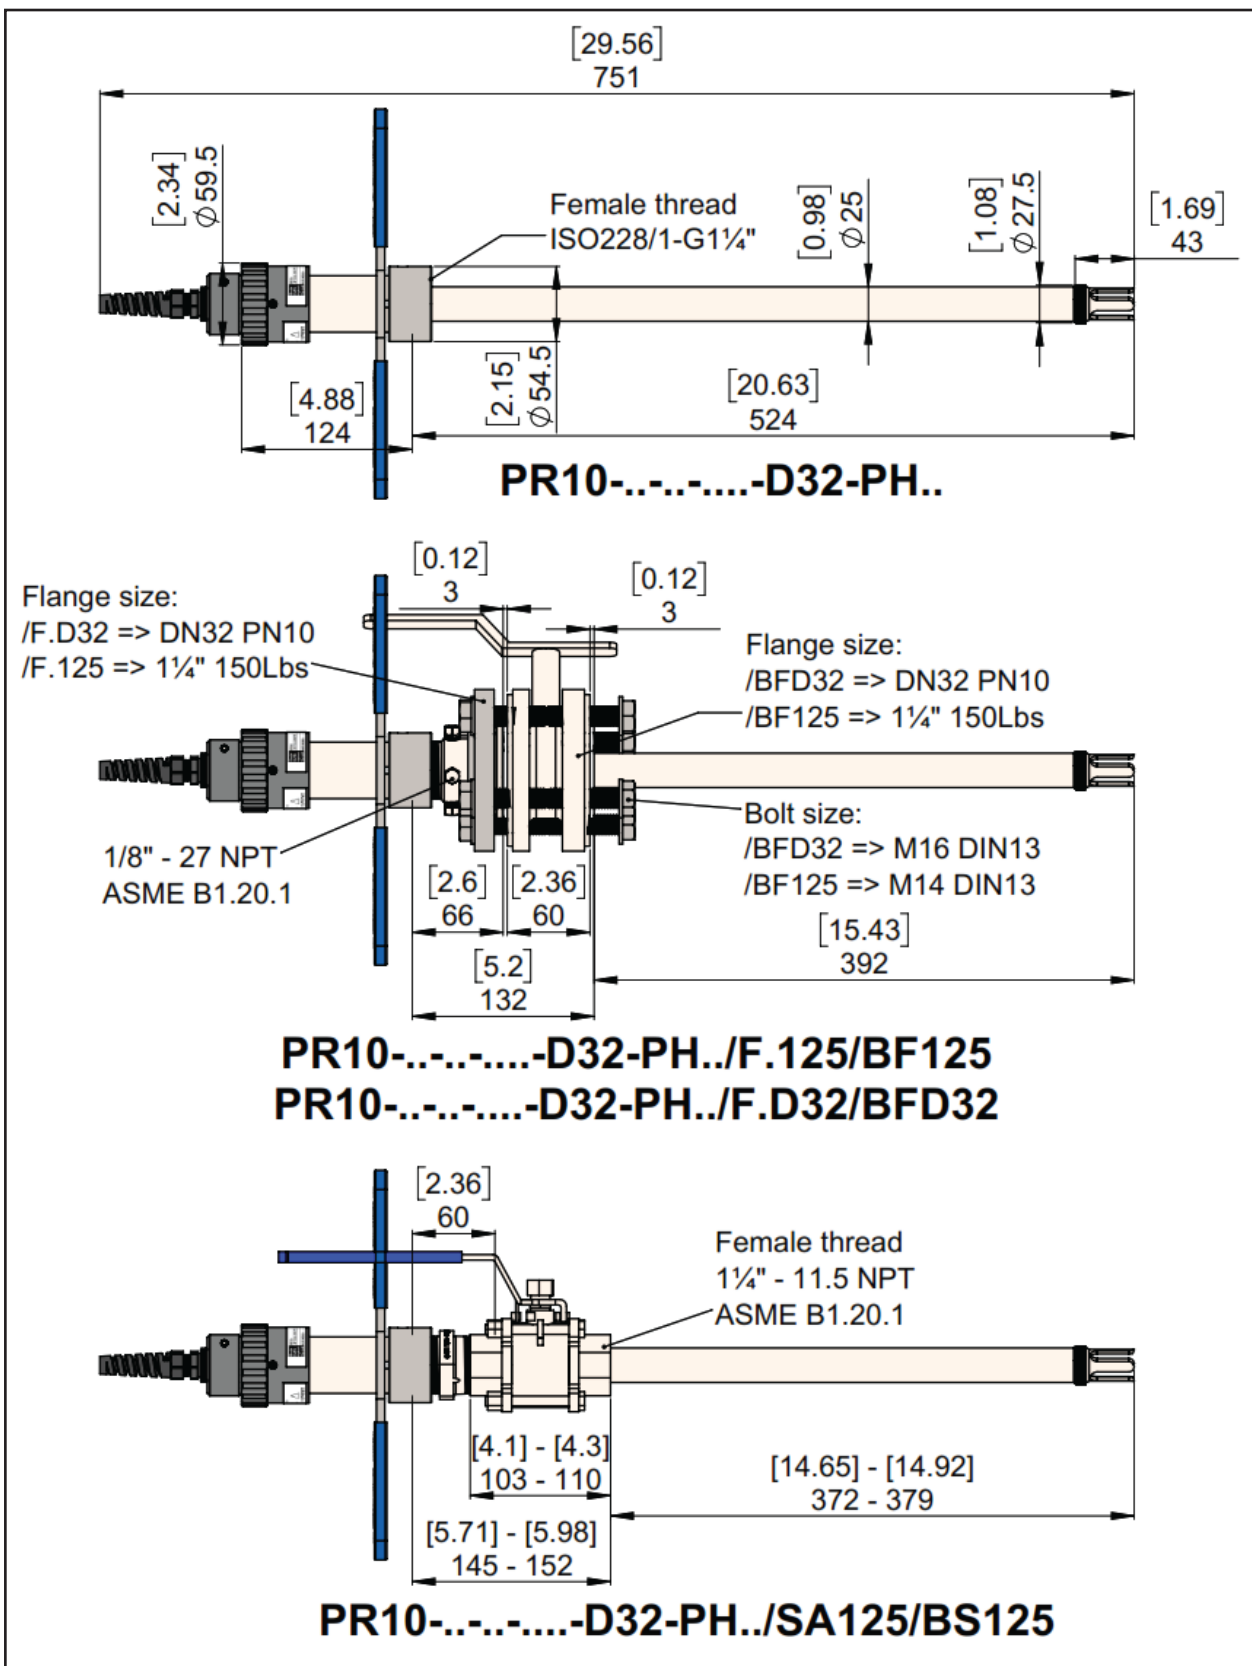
Dimensional drawing PR10...-D32 with mounted pH sensor - units in mm [inch]
